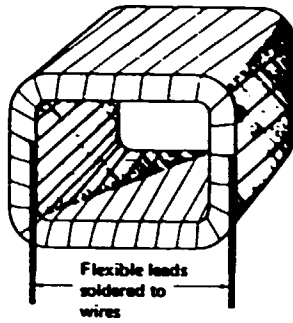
A series-field coil is taped after flexible leads are soldered to the beginning and end of the coil. The coil is usually taped with a layer of varnished cambric and a layer of cotton tape.
